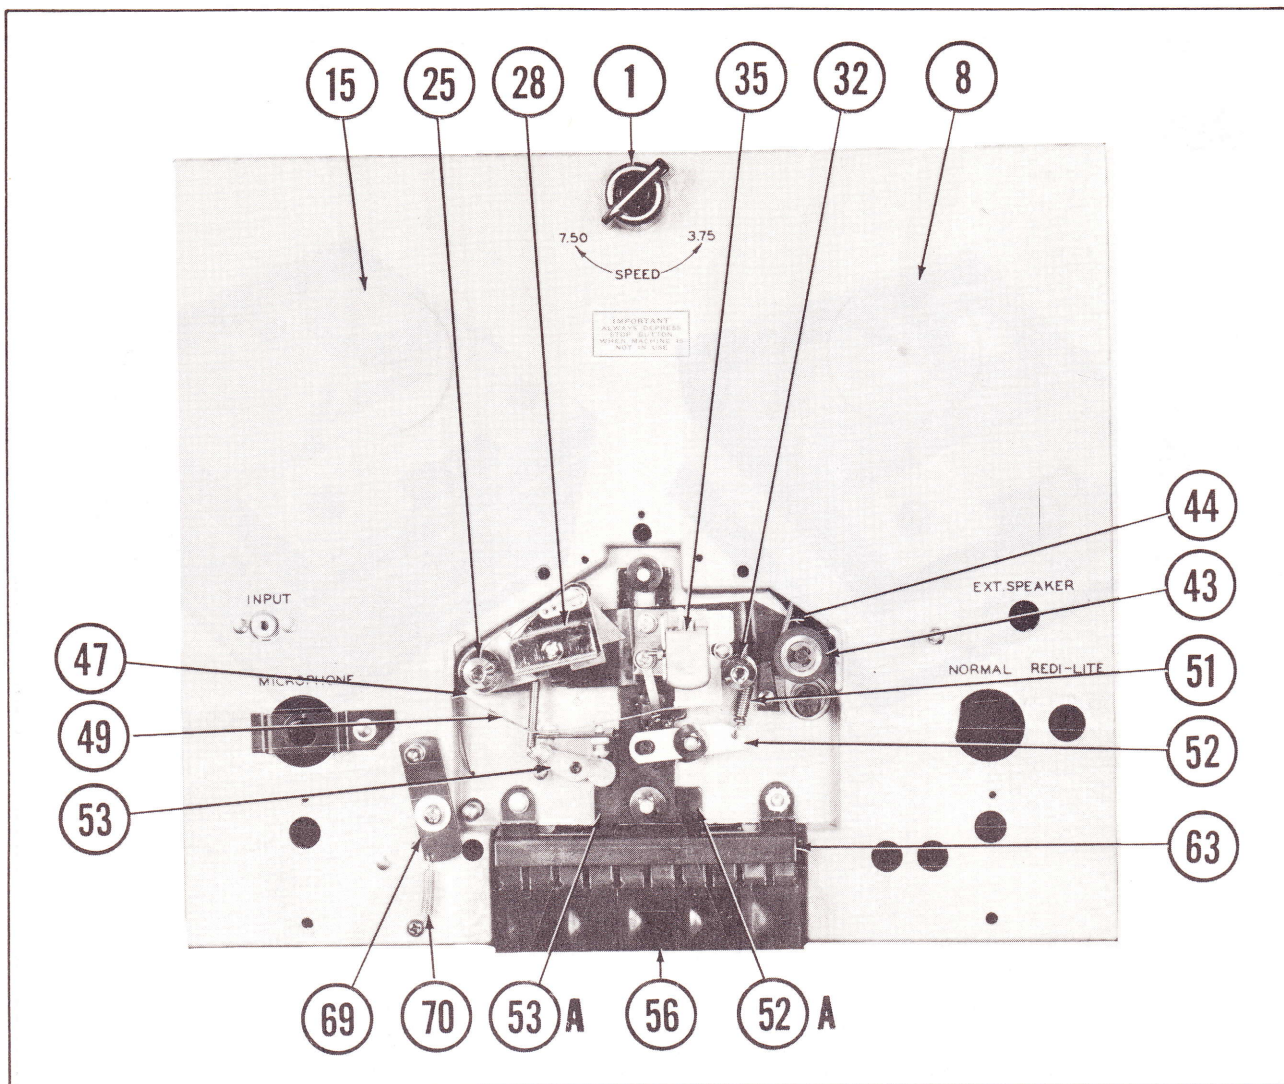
TOP VIEW OF MECHANISM WITH ESCUTCHEON REMOVED
